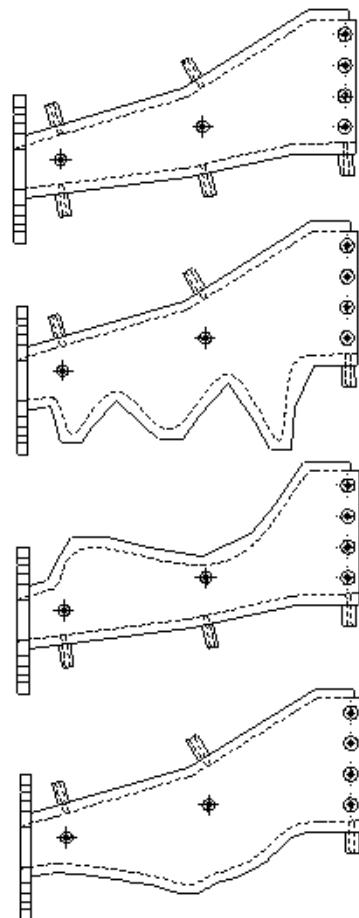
, CAD drawing side views of the four diffuser section models produced, listed in order with top being model 1 and bottom being model 4 (optimised)
